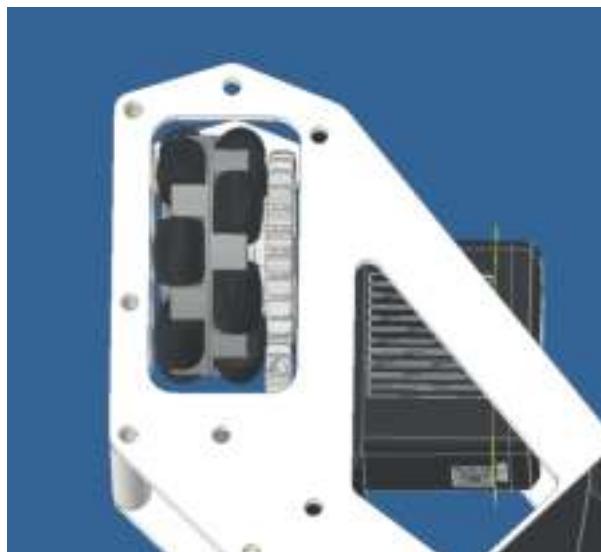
close up view of the wheels with tolerance to remove wheel. Additional holes are for extra stand off bracing.
